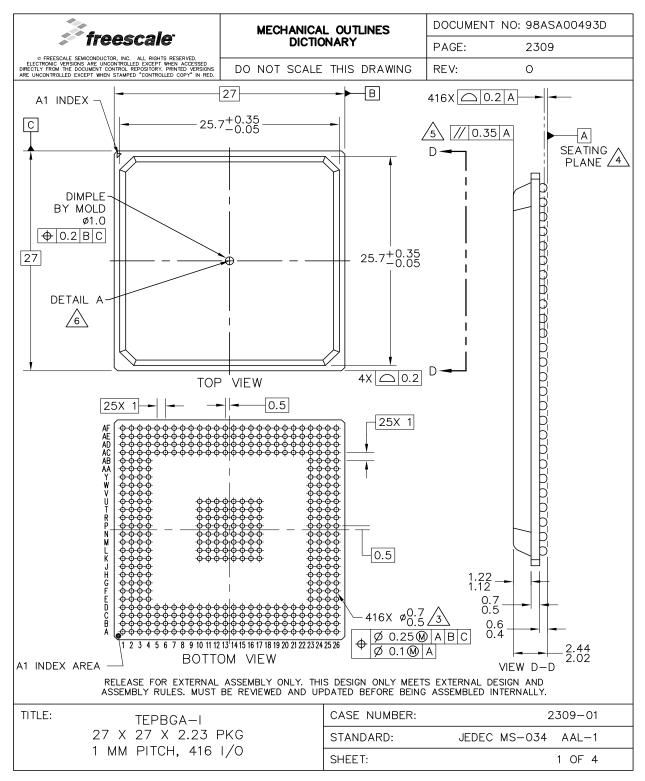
416 TEPBGA (emulation) package mechanical drawing (Sheet 1 of 3)
